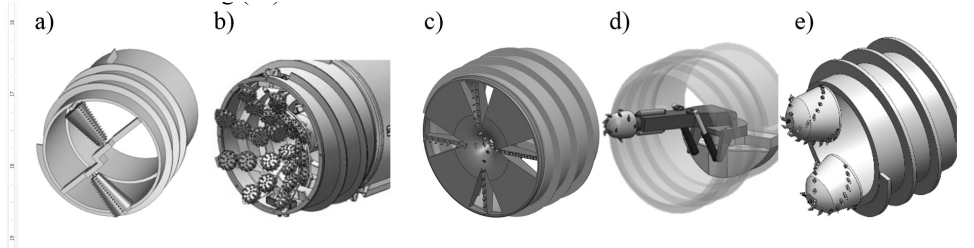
Different types of geokhods cutterheads: a) – cutting drum, b) – radial multi-heading, c) – rotating cutterhead, d) – single-heading, e) – double-heading.
